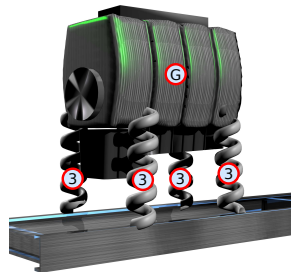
Exploded view of the L2 link between the engine or the cab and the frame.
